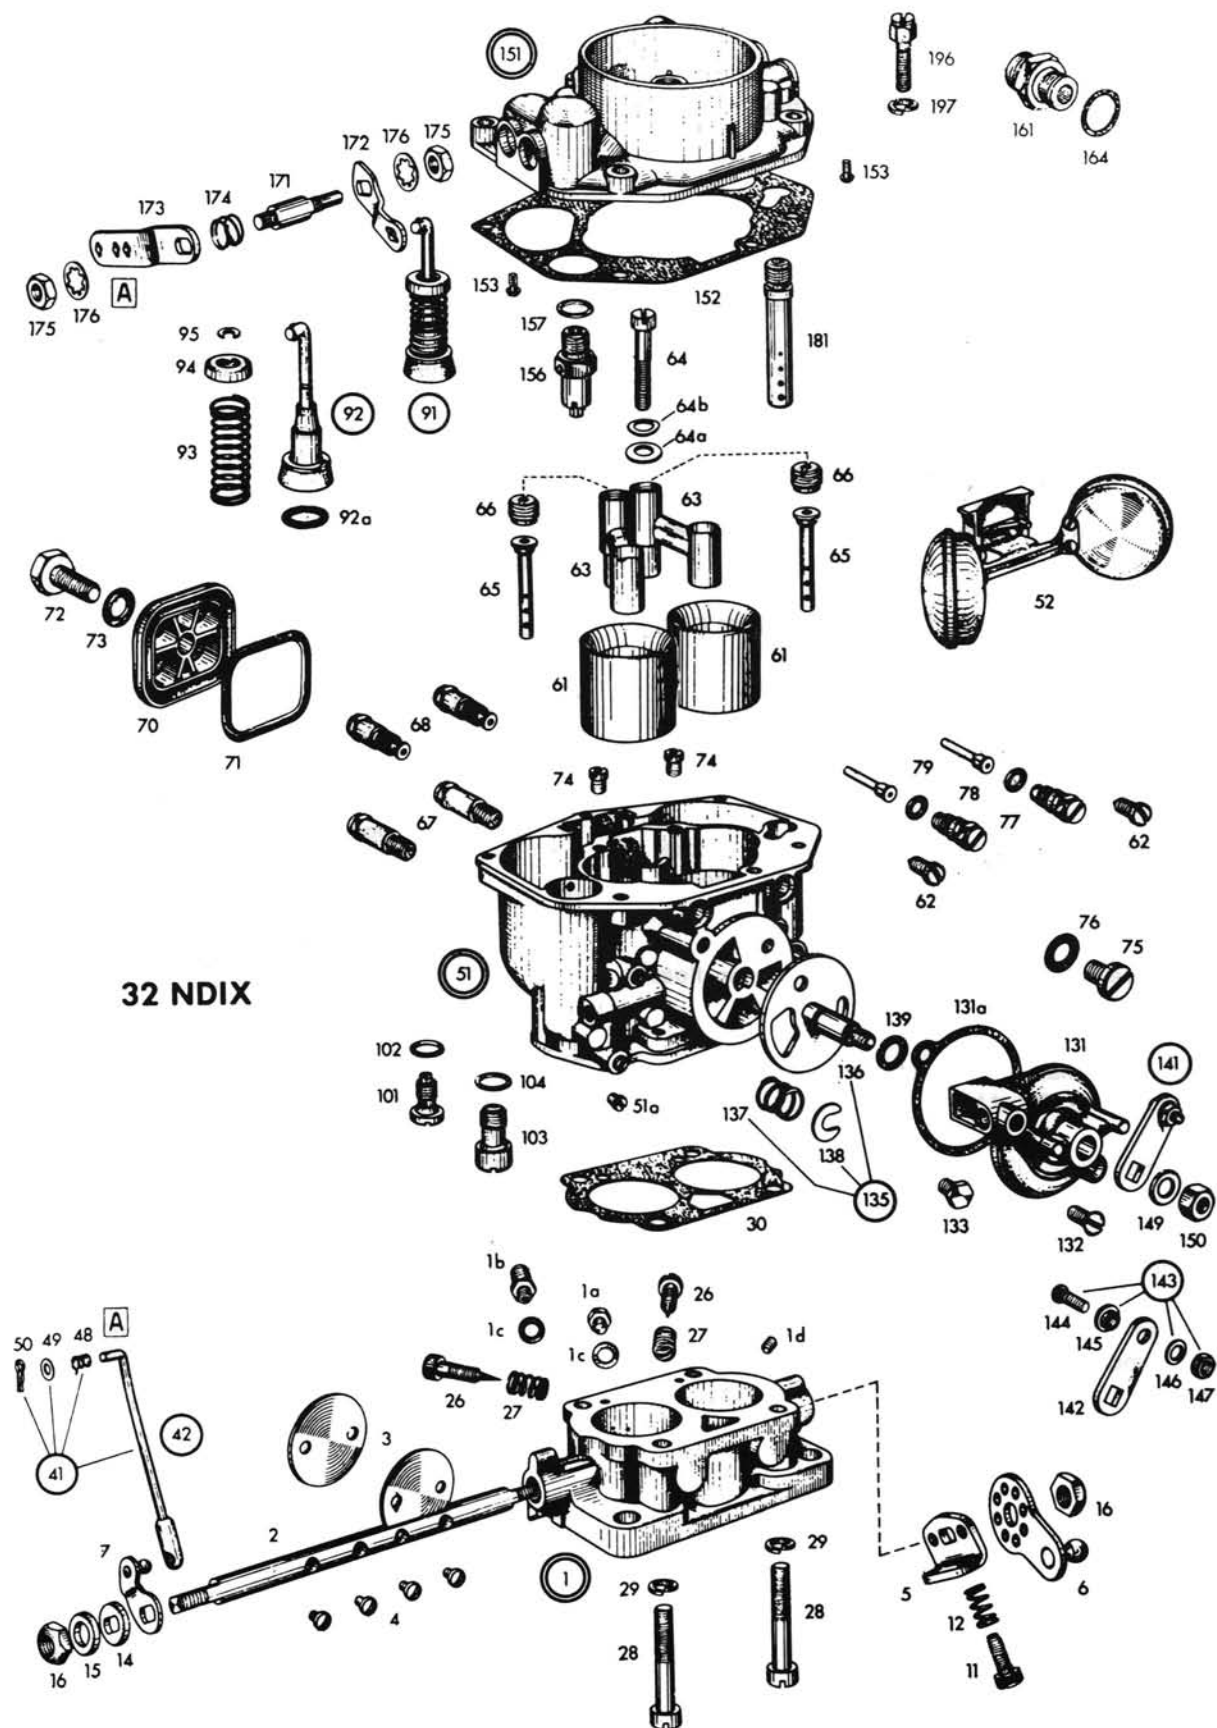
Pallas-Zenith off-road double downdraft carburetor 32-NDIX
